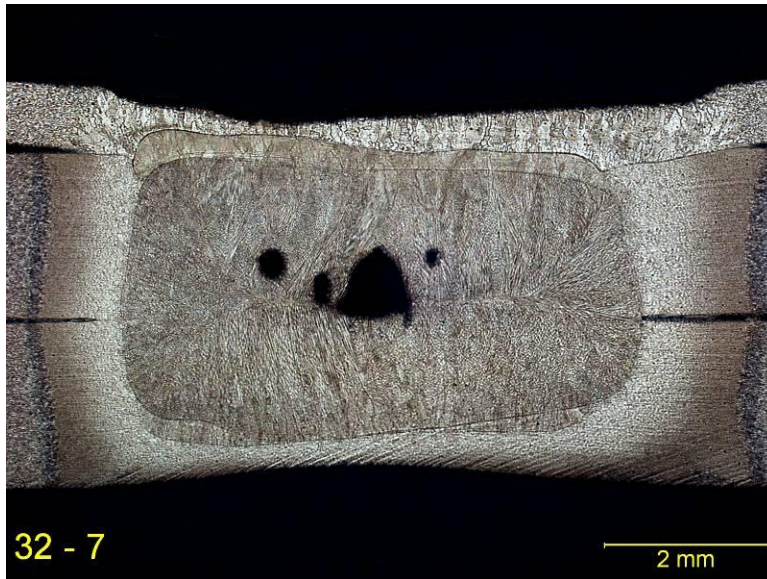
Cross Section of the Weld in Trial 32, Showing 80% Penetration into the Attached Thin Sheet (This weld was made under conditions of a Class 3 electrode on the thin sheet side, a 8-mm electrode on the thick sheet side, a 280-ms weld time, two pulses in the main current, a secondary to primary force ratio of 1.5, a primary to total weld time ratio of 0.4, a 2400-N weld force, and a secondary to primary current ratio of 1.4)
